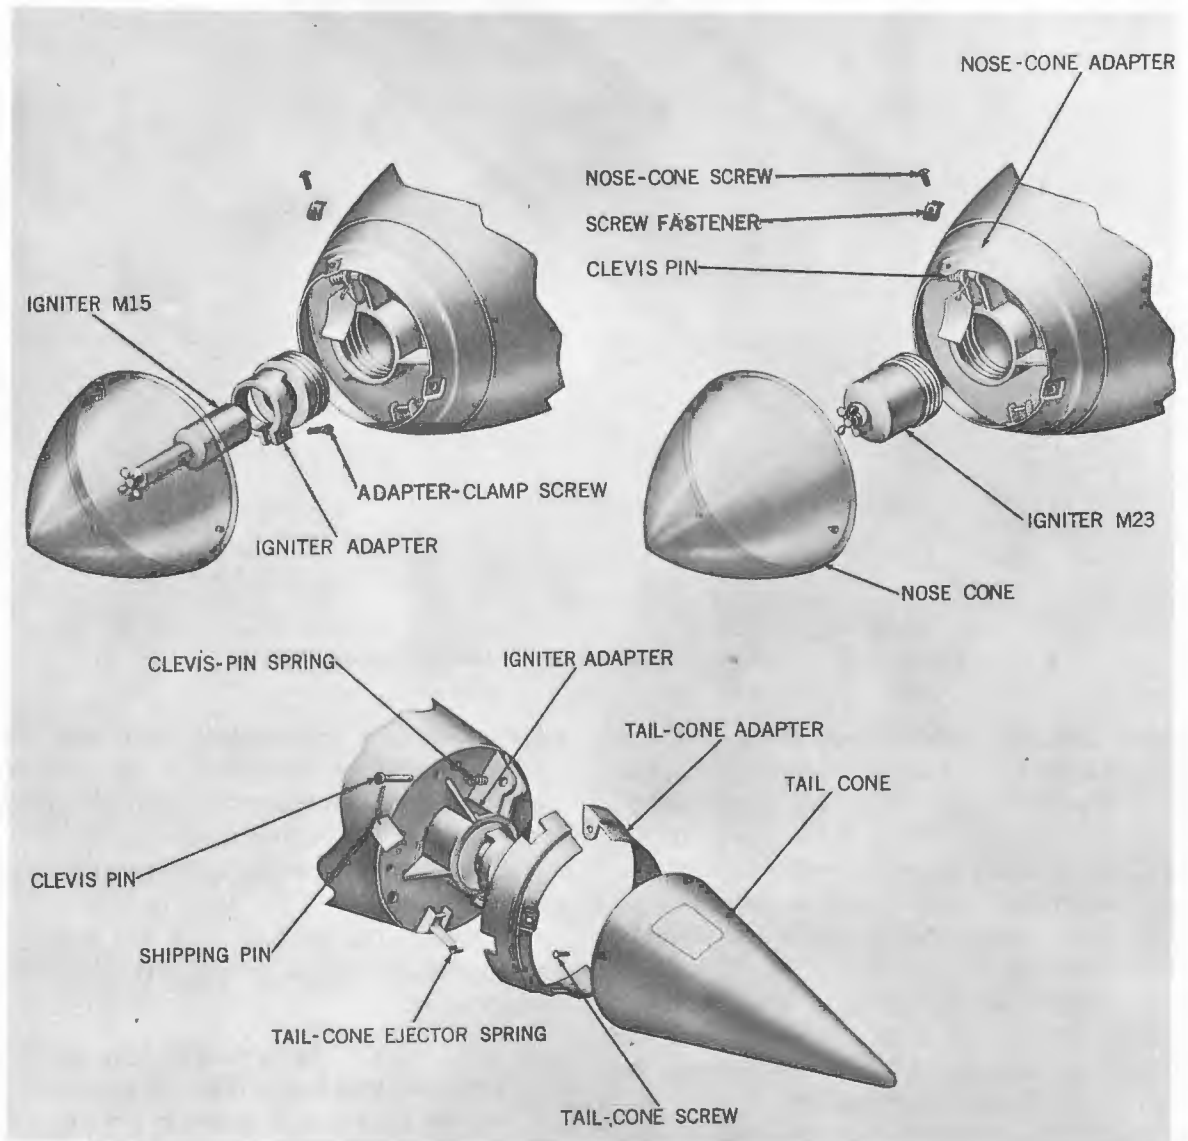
750-lb Fire Bomb Mk 77 Mod 0, Assembly Details.
